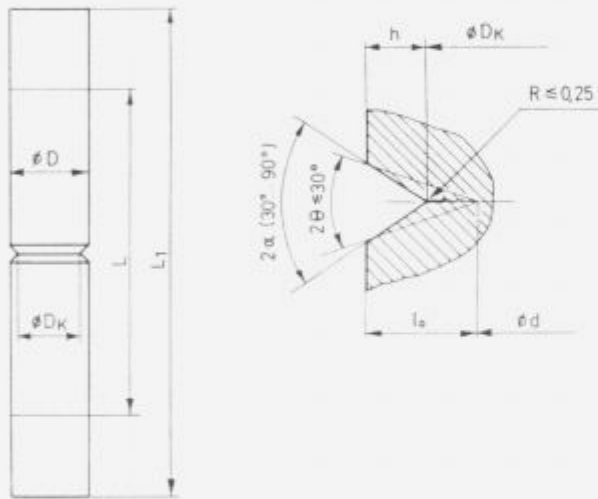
Cylindrical probe with concentric fatigue crack—(type 2 according to GOST 25.506-85).  $L$  = length between the clamped parts of probe in the tensile testing machine.  $L = 5D$ ;  $d = (0.6 \text{ to } 0.7)D$ ;  $L_1 \geq 7D$ ;  $l_0 = 0.5(D - d) \geq h + 1.5 \text{ mm}$ ;  $l_0 \geq 3.7 \text{ tg } \alpha$ ;  $D_K = D - 2h = (0.65 \text{ to } 0.85)D$ .
